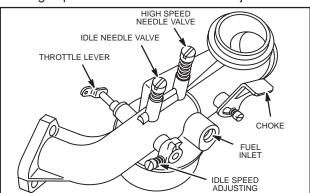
SMALL ONE-PIECE FLO-JET CARBURETOR
